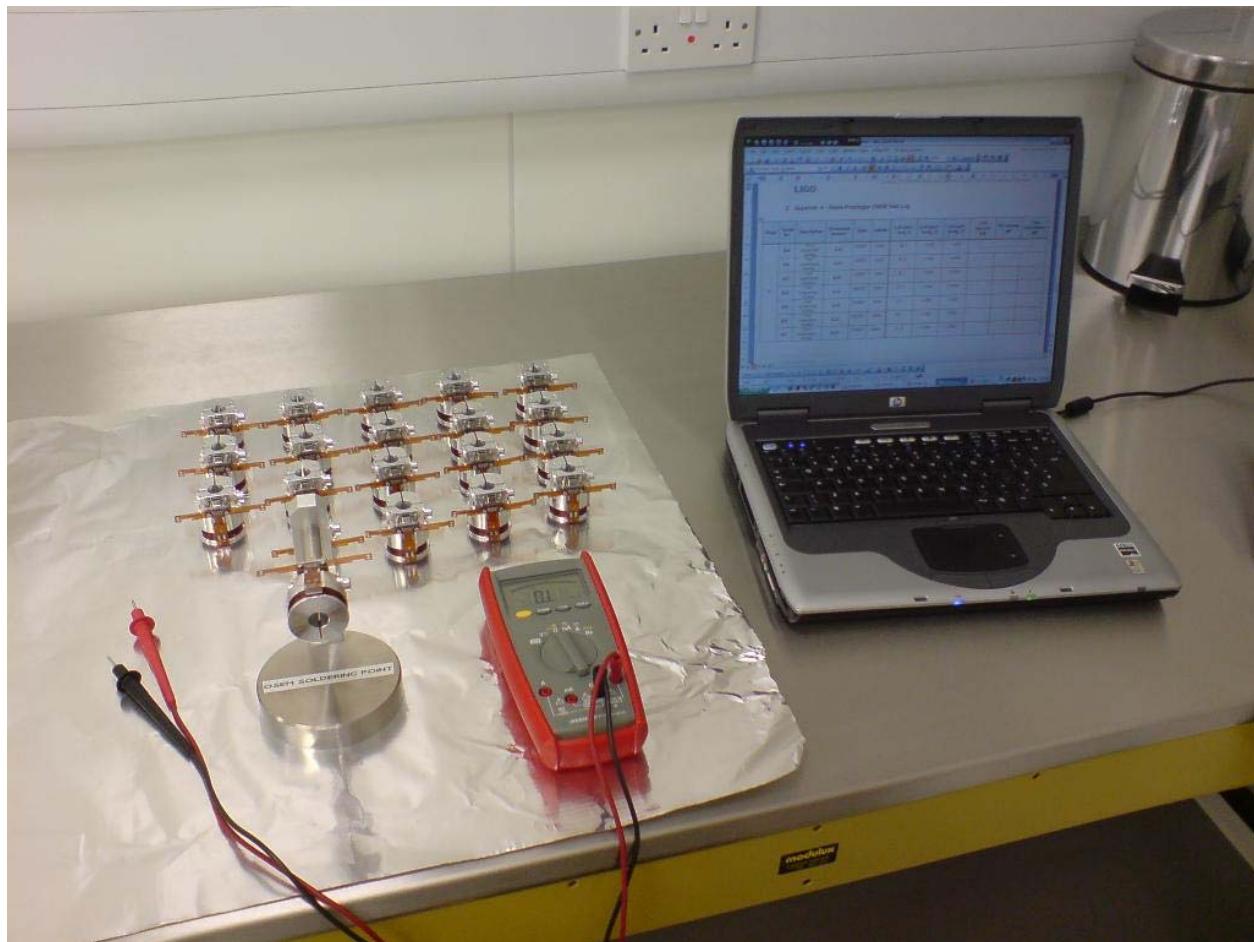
Testing carried out on part-assembled coil-former using the DVM.
